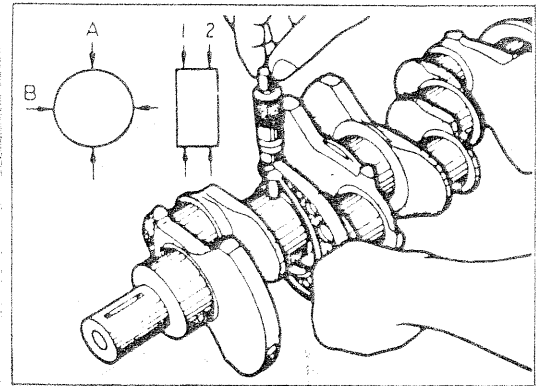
N. Measuring Crankshaft or Pin Diameter
